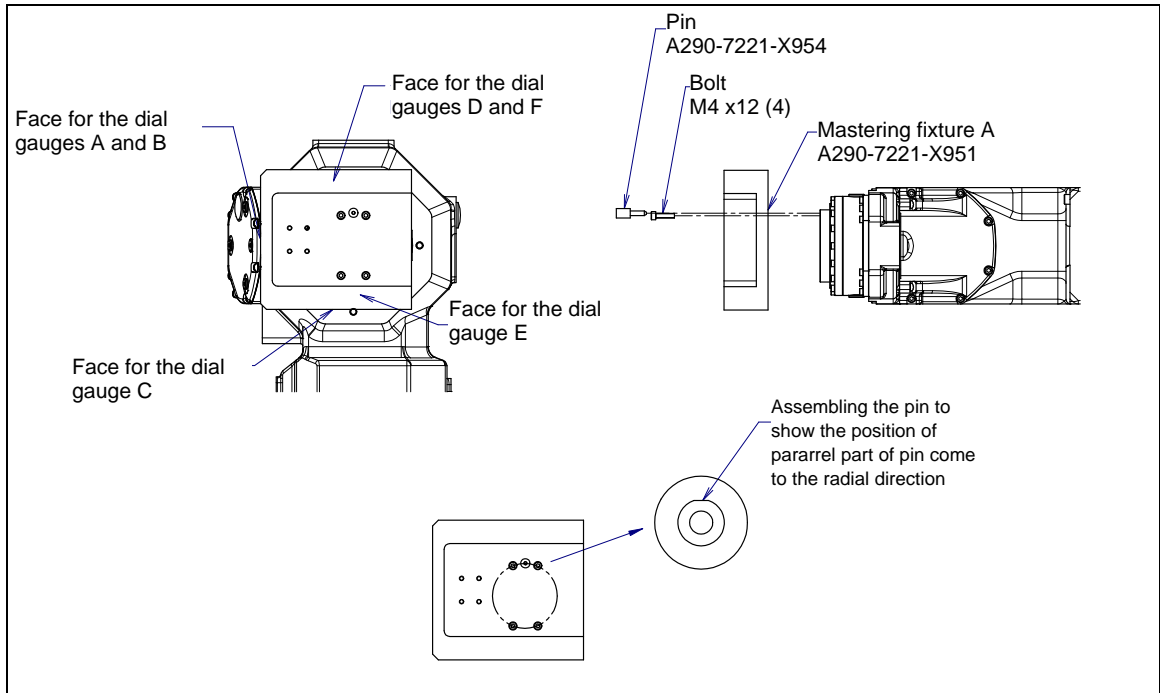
(d) Assembling the fixture to the wrist flange (except 10M/10MS)
